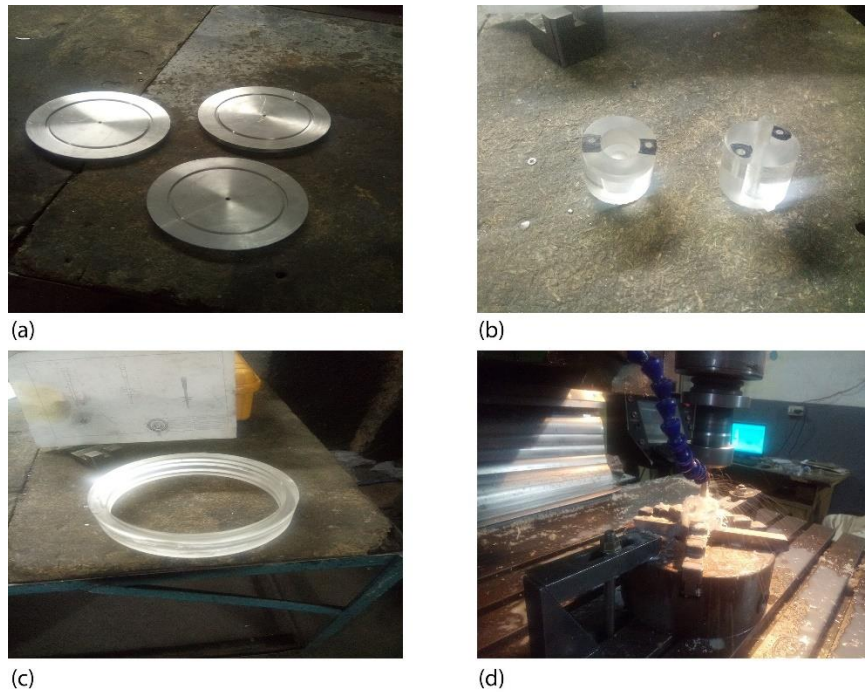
Manufactured parts of the powder hopper (a) powder transfer discs (b) spreader and suction tube (c) Disc housing central ring (d) CNC milling operation for the manufacturing of spreader tube
